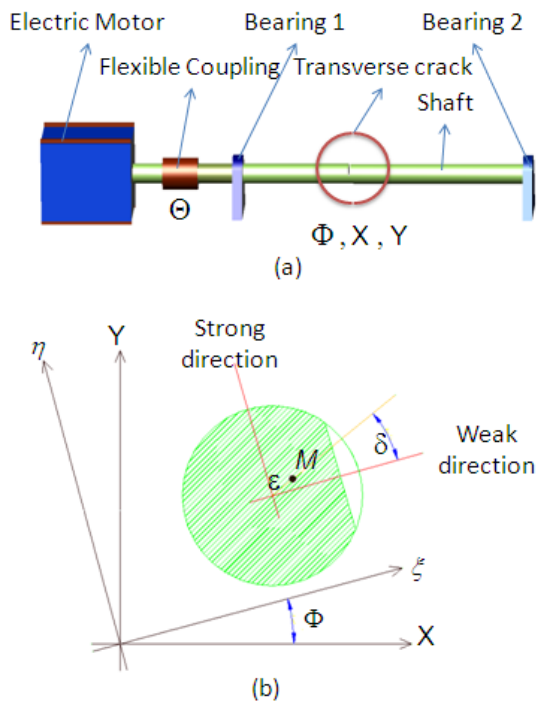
(a) Schematic configuration of shaft system, (b) Schematic cutting view of cracked shaft
